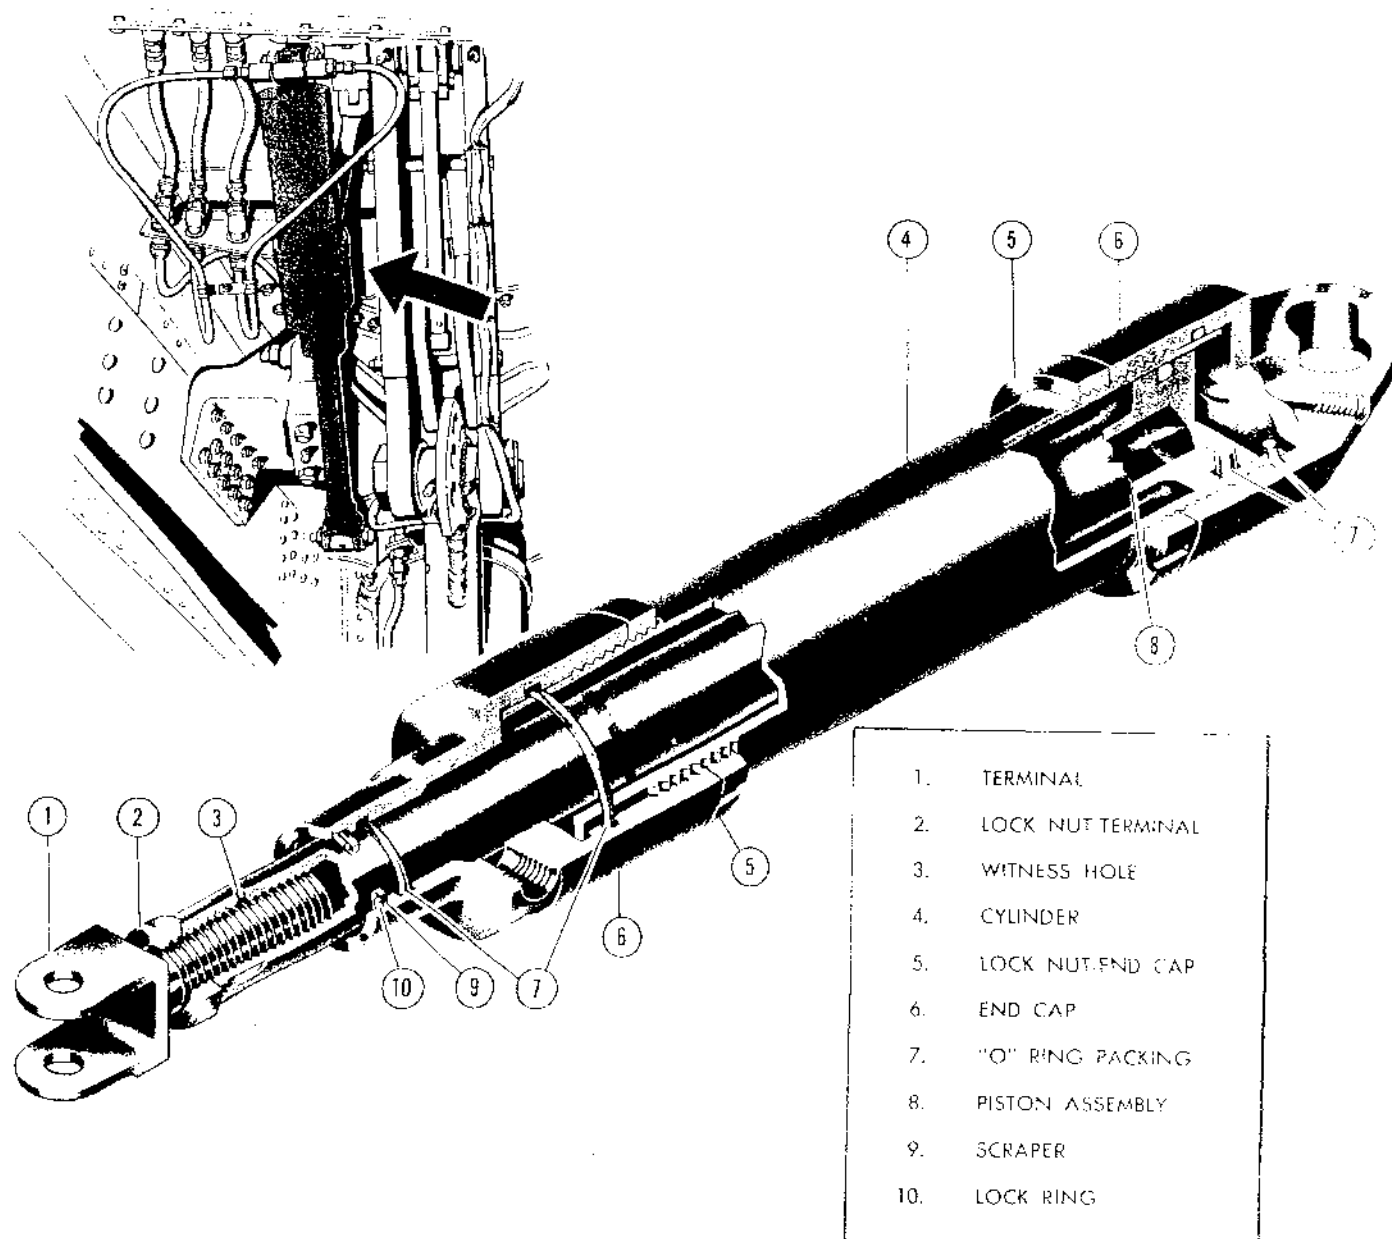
Main Landing Gear Actuating Cylinder, Early Airplanes
